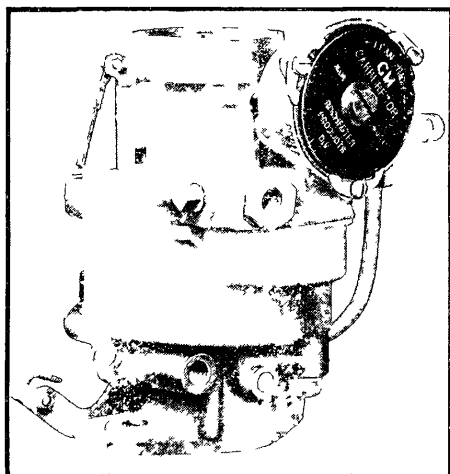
HH Exterior view of carburetor showing idle mixture adjusting screw and automatic choke. Rochester BC carburetor. 1951-52 Pontiac Six
